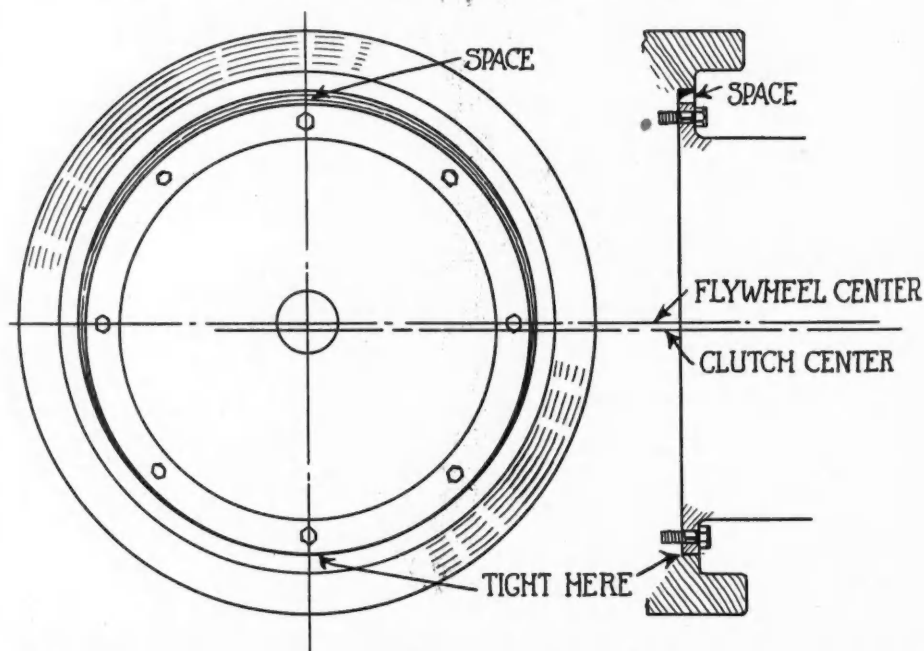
Example of an oversize flywheel recess for bolting the flange of the clutch.—The cap screw holes being clearance holes only allow the drum to find its seat, usually in a misaligned position.
